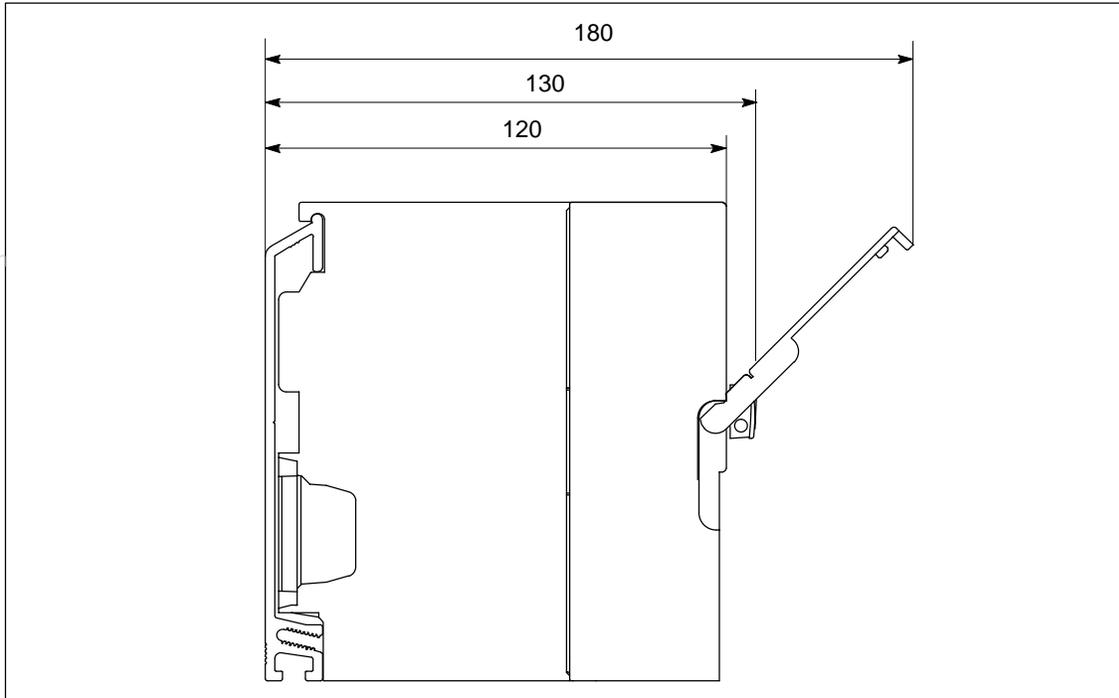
Dimensioned Drawing of the CPU 314 IFM, Side View
